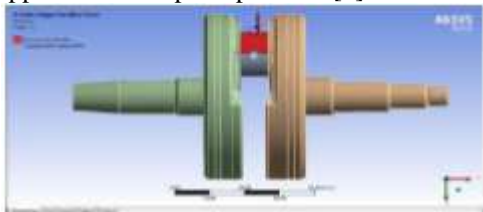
Cylindrical support on Flywheel & Flywheel Drive
